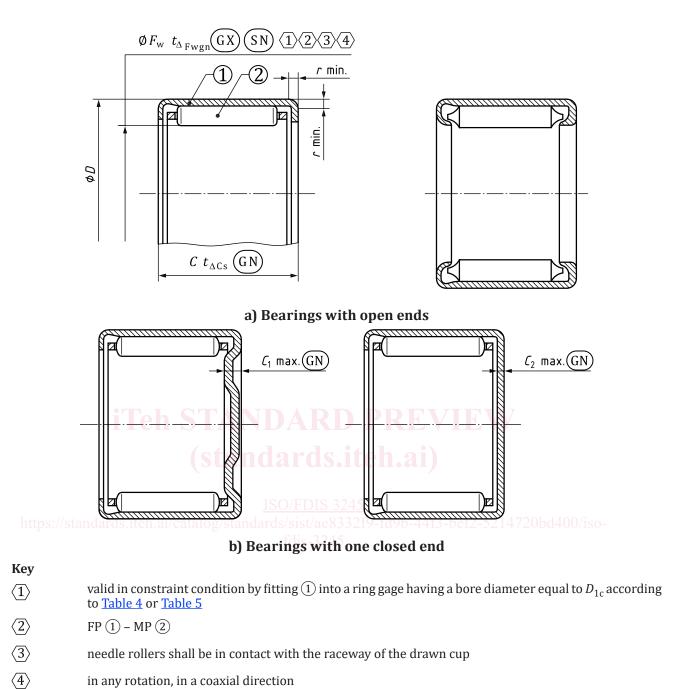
Example of drawn cup needle roller bearing without inner ring design
